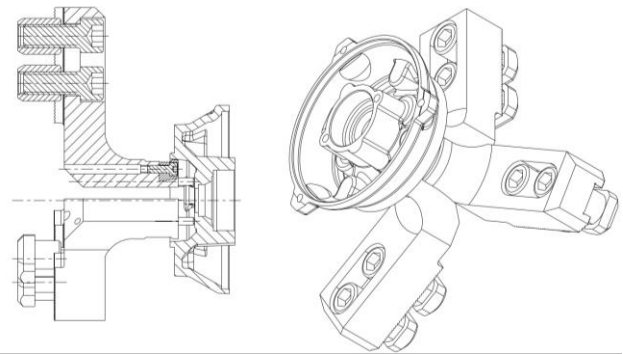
Sketch of the assembly of an internal clamp with a clamped workpiece.
